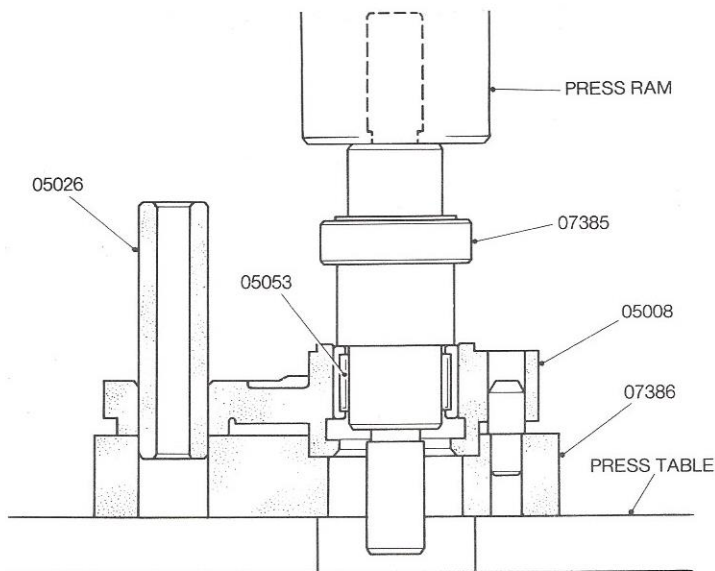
Removing the Layshaft Carrier Needle Roller Bearing
